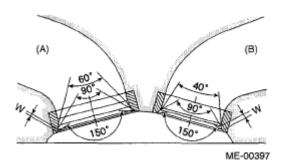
Identifying Seat Guide Dimension Courtesy of SUBARU OF AMERICA, INC.
